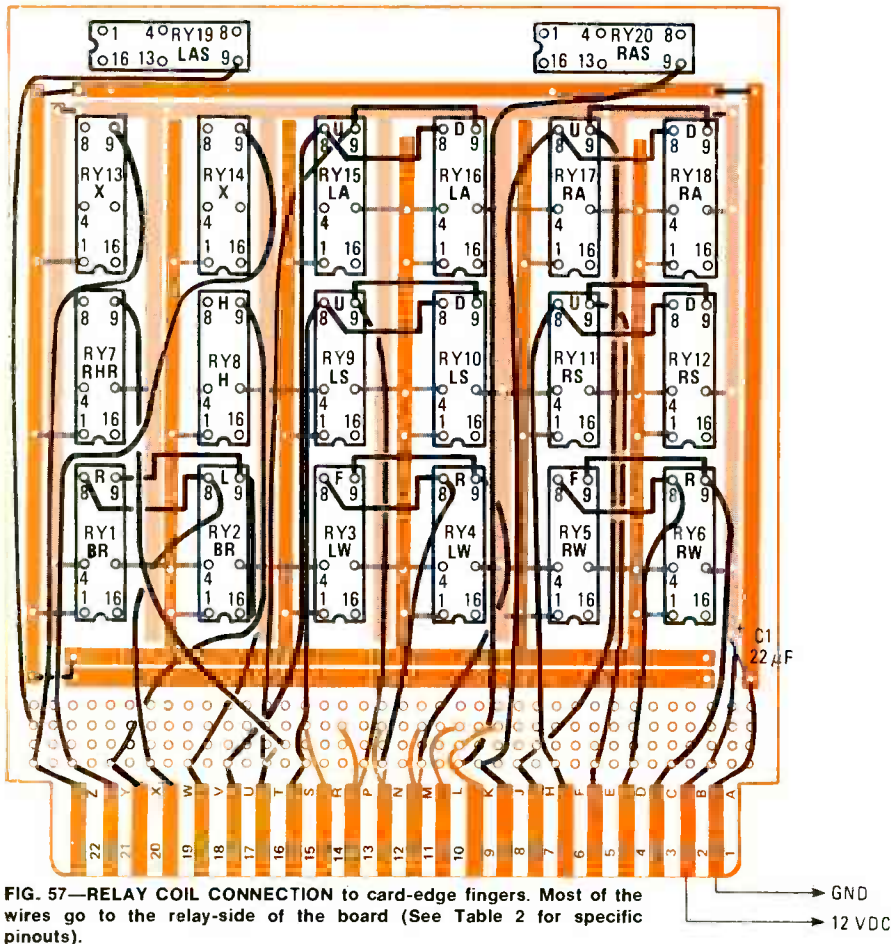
RELAY COIL CONNECTION to card-edge fingers. Most of the wires go to the relay-side of the board (See Table 2 for specific pinouts).
